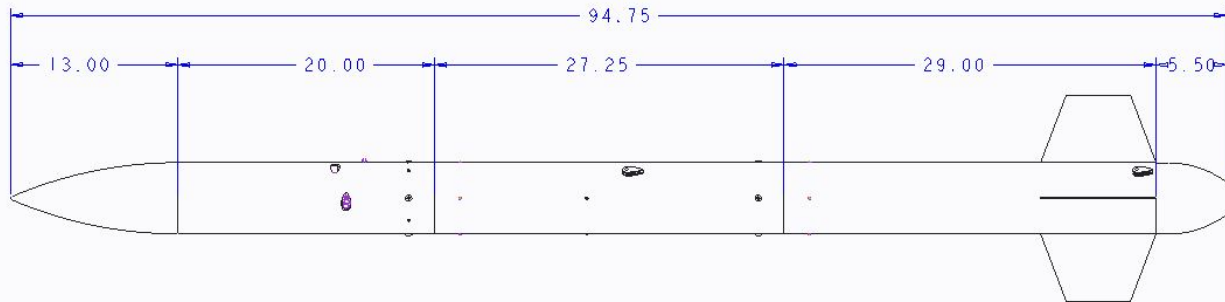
Dimensional Full Scale CAD Drawing (inches)
